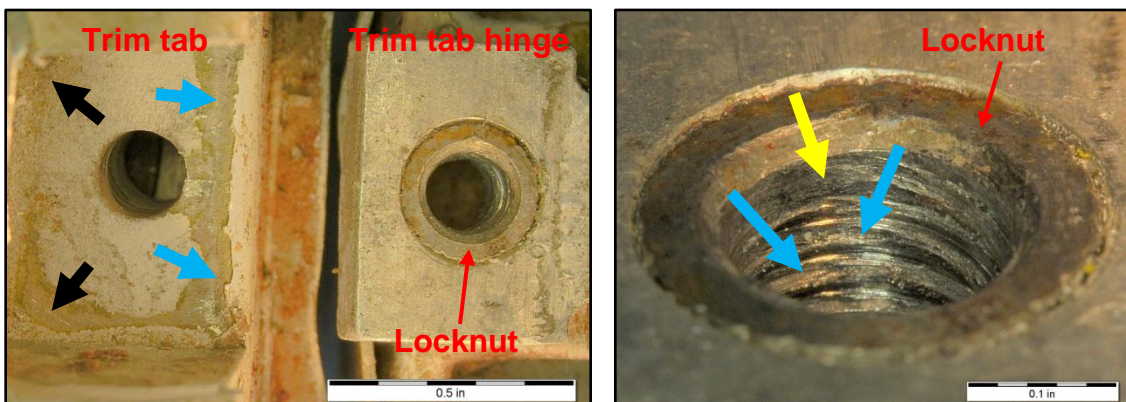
The mating surfaces of the outboard trim tab hinge with the trim tab (left) and the thread in the trim tab hinge locknut (right).
